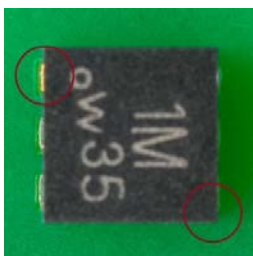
DFN2020-6 (SOT1118) without wettable side pads (4-D260): Solder paste printing with fails
